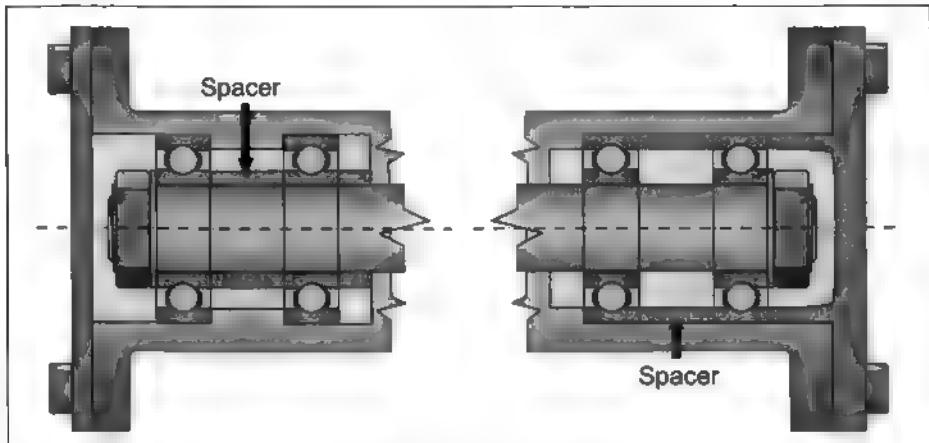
Two alternative ways of using a spacer with a pair of ball bearings.
